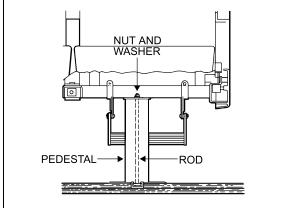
SEAT PEDESTAL ASSEMBLY
